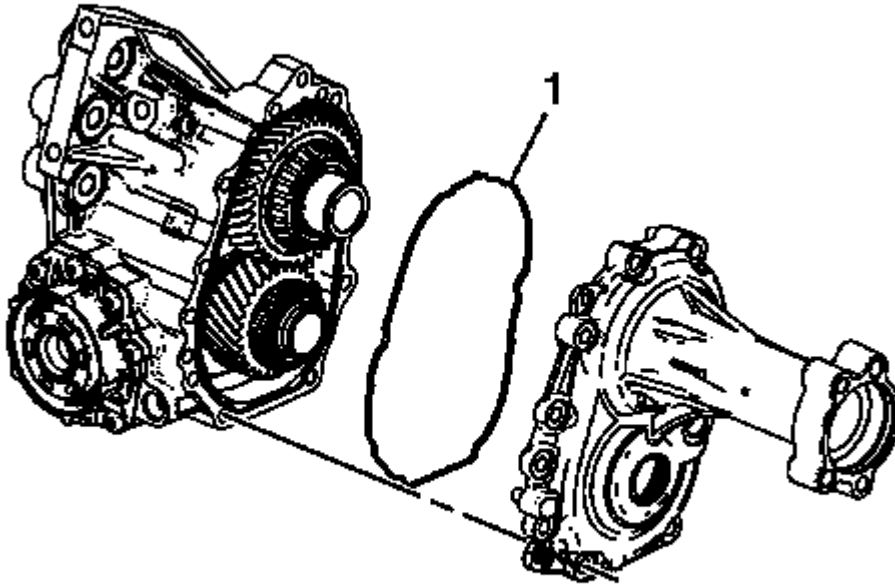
View Of Rear Extension Housing-To-Transfer Case Seal
